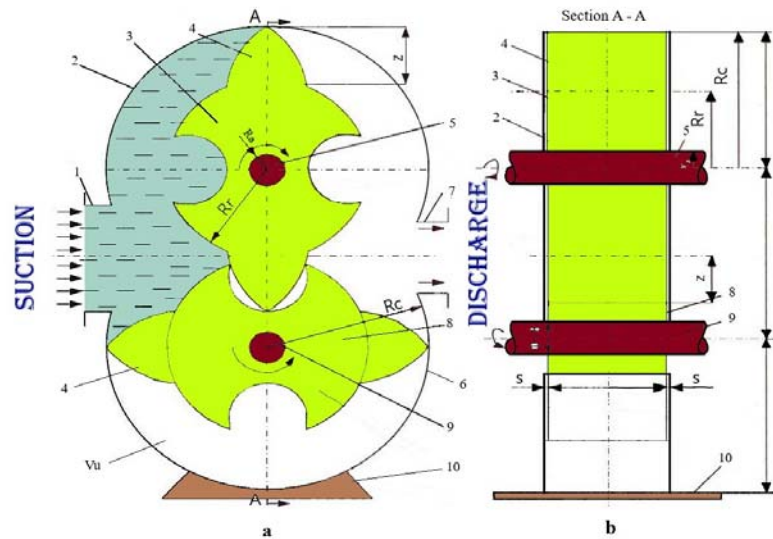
Cross section (a) and longitudinal section (b) through the rotating machine
